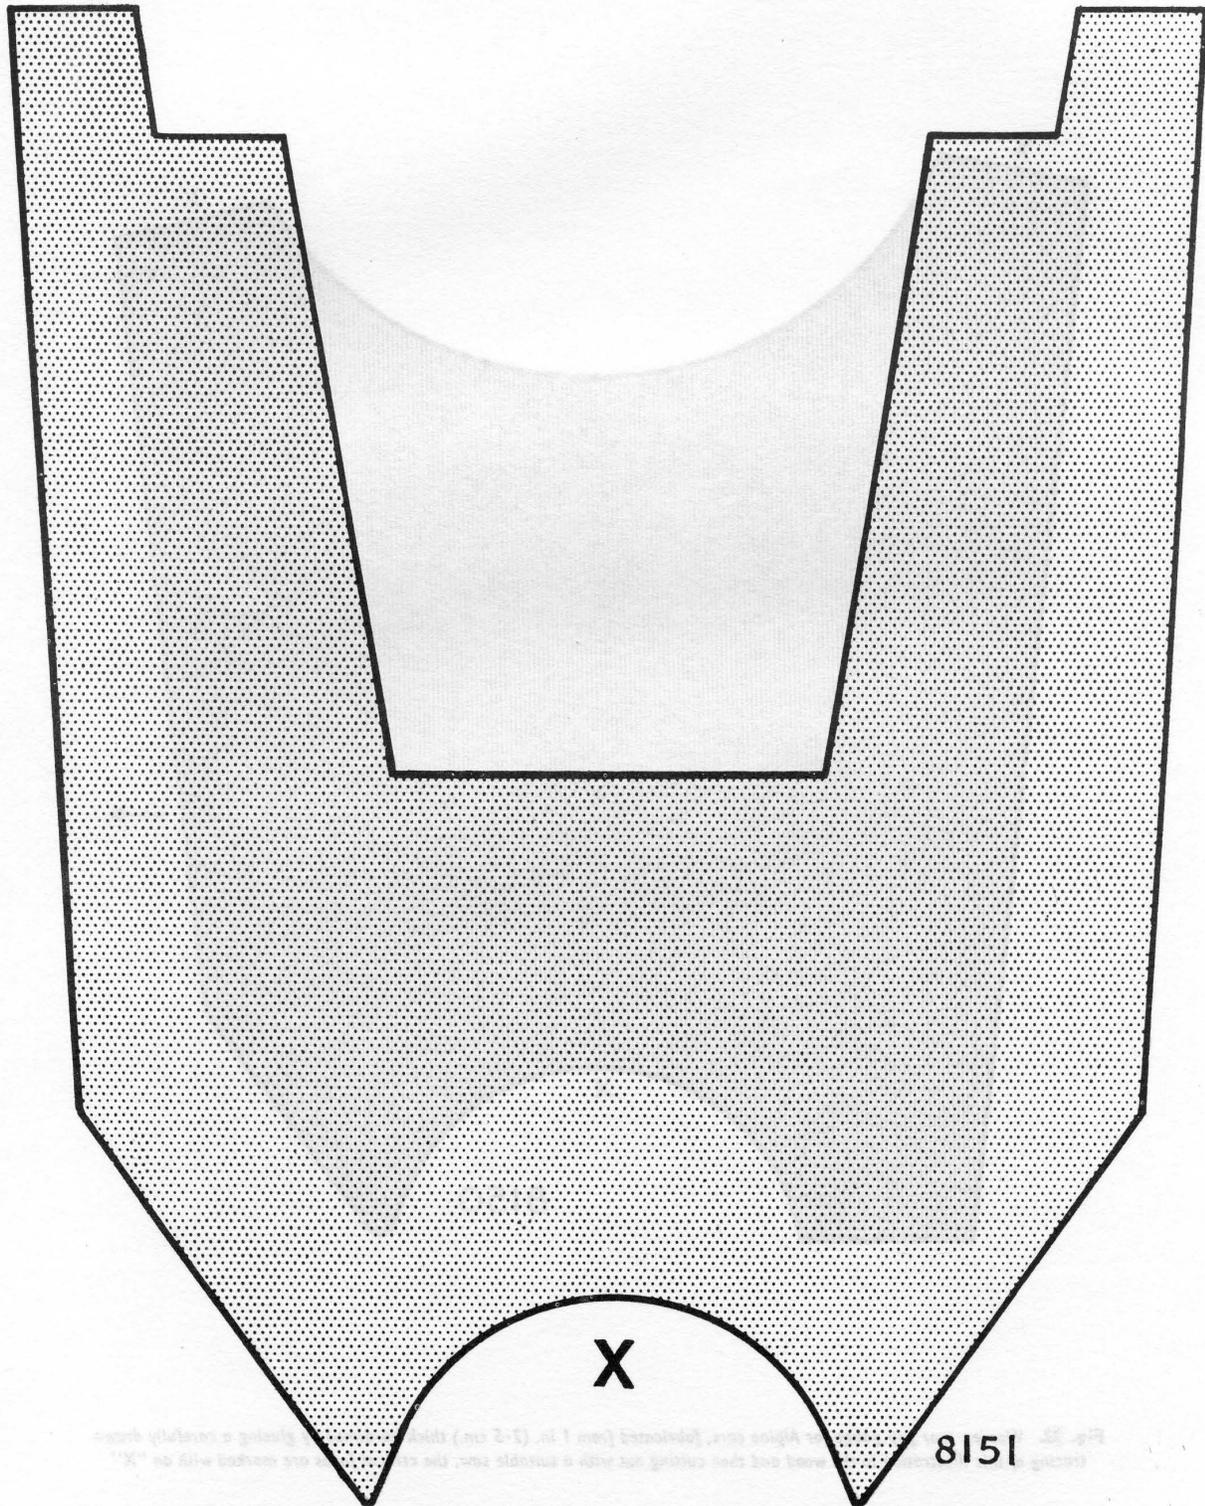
Wooden rear gap gauge for Super Minx, Vogue and Sceptre cats, fabricated from 1 in. (2.5 cm.) thick hardwood by gluing a carefully drawn tracing of this illustration to the wood and then cutting out with a suitable saw, the critical faces are marked with an "X"
